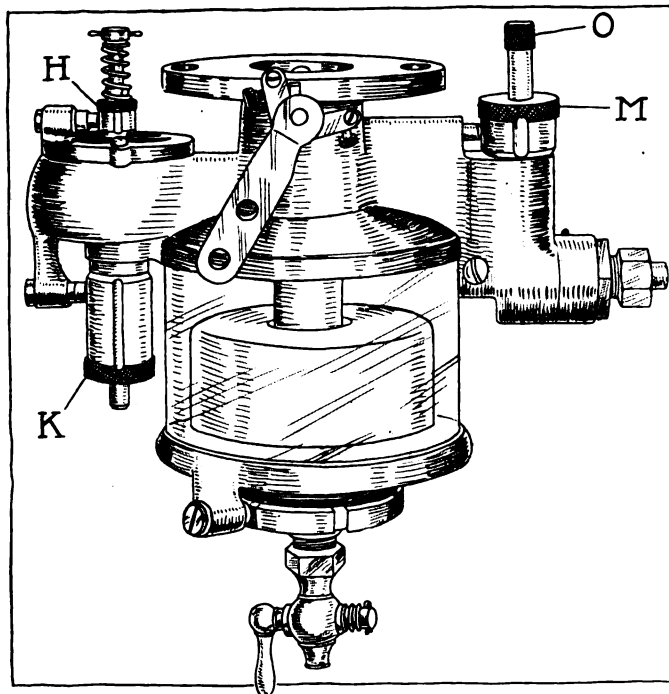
Illustrating the adjusting points on B-type Stromberg carbureter
